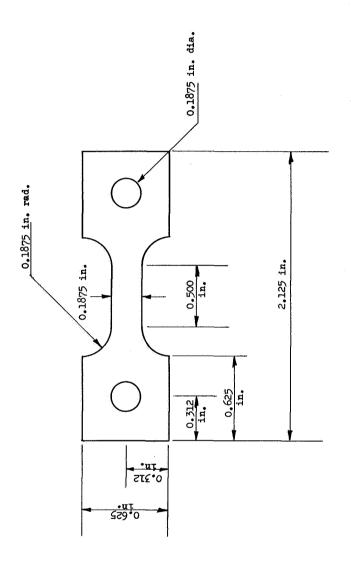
Tensile test specimen for alloy less than 0,225 in. thick
